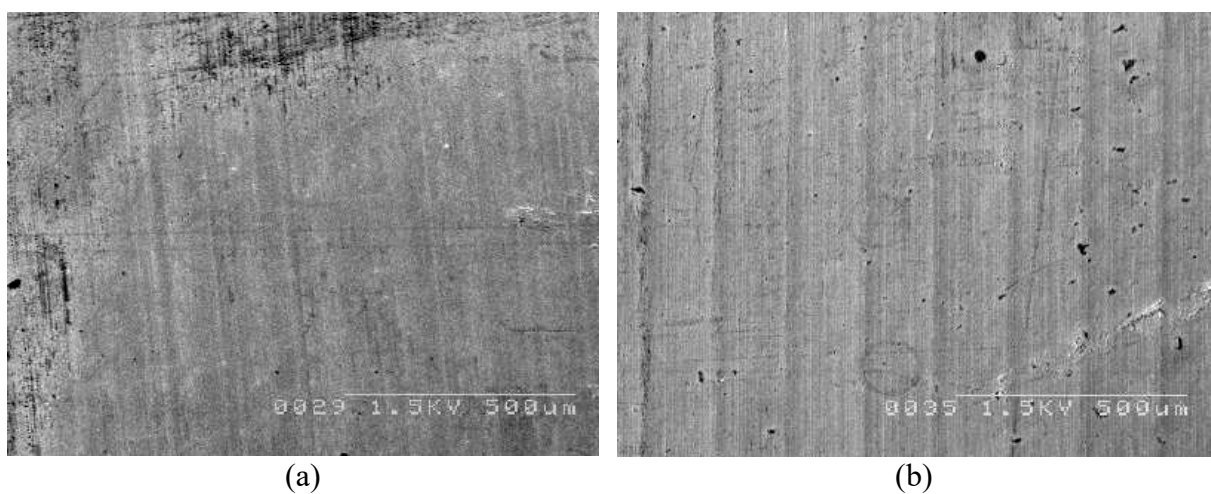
Surfaces generated after machining with uncoated carbide T1 tool with a coolant pressure of 20.3 MPa at cutting speeds of (a) 120 m min^{-1} and (b) 130 m min^{-1} .
